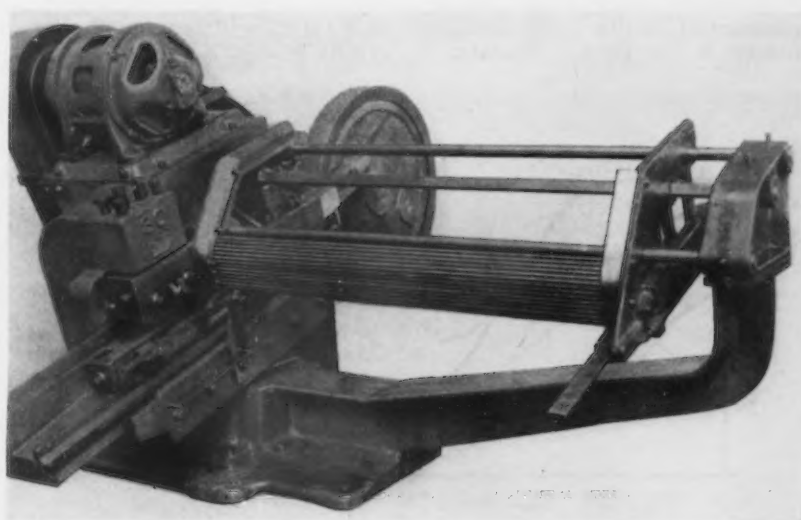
Magazine-fed thread roller for rods 6 to 60 in. long. This operates on only one end of the rod, as in Fig. 1.
